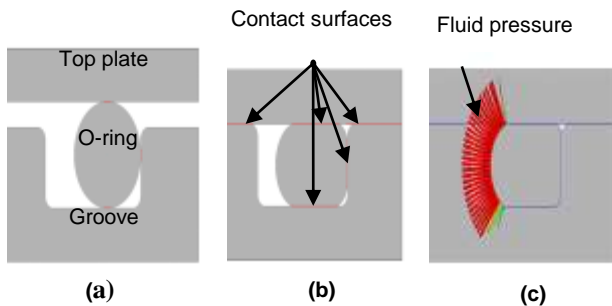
(a) Mounting the O-ring in a groove. (b) Compression of the O-ring. (c) Application of fluid pressure
